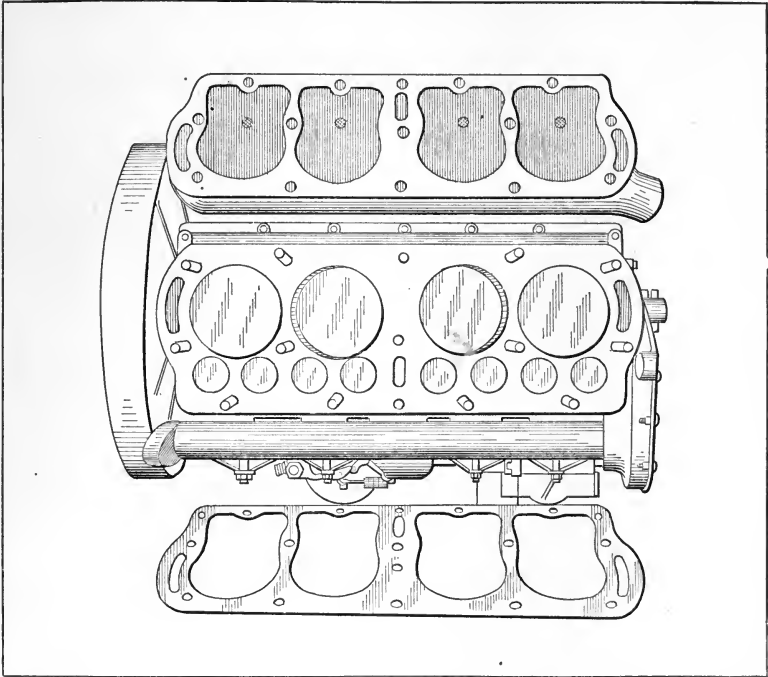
Example of Four-Cylinder Block Motor having One Separately Cast Head Member Common to All Cylinders. A Copper-Asbestos Gasket is Utilized in Making a Gas- and Water-Tight Joint Between the Parts. Note Accessibility of Pistons and Valves.
